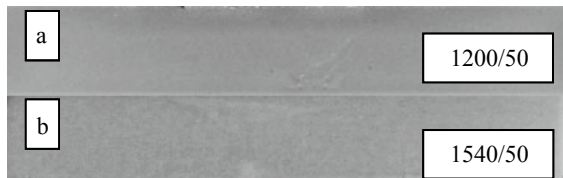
Top surface of FSW with Interlayer at different rotational and welding speeds
